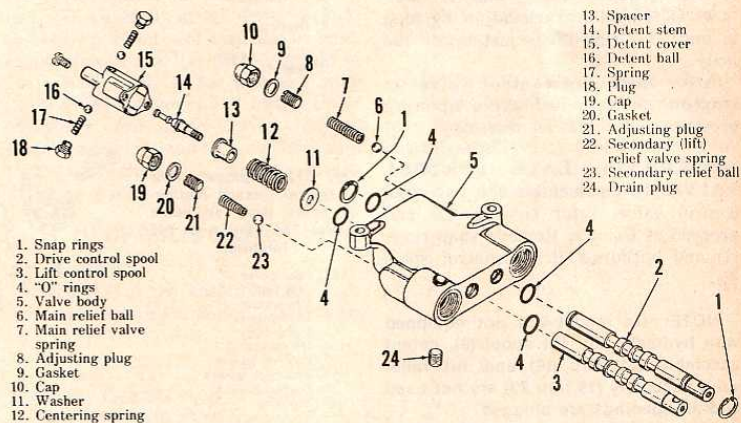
Exploded view of late Dukes two-spool control valve used on late model 444 and all model 224 and 446 tractors. Spool (3) and items (11 thru 23) are not used on model 224 not equipped with hydraulic lift.
